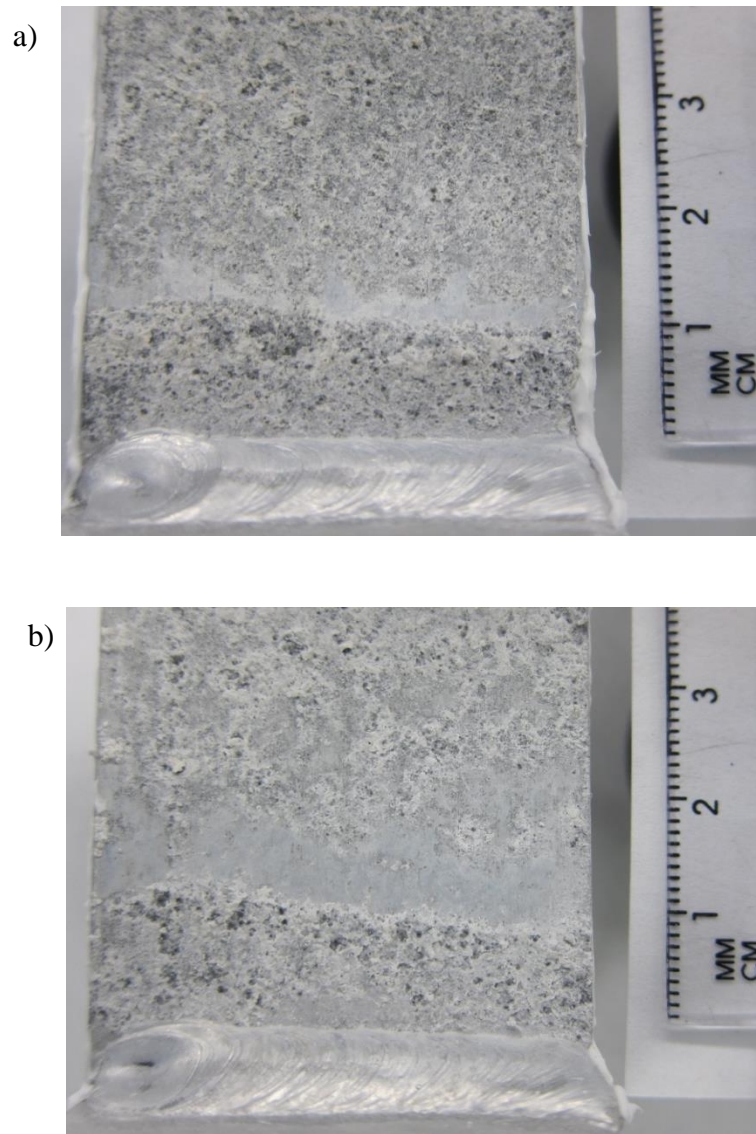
Close-up images of duplicate samples of T-joint welded configuration E3 (ER5356/AA7003/L) in the as-welded T6+PB condition.
